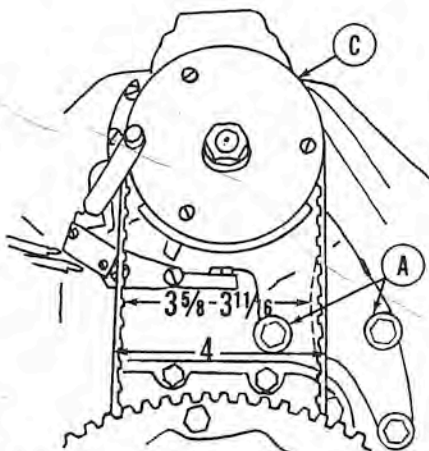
Drive belt tension adjustment is correct when belt can be deflected 5/16 to 3/8 inch as shown. Adjust by loosening bracket attaching screws (A).
